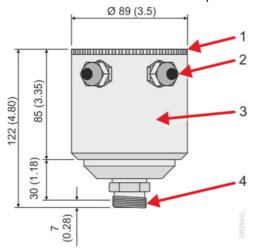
Technical specifications and mechanical structure of Flow-Guard V Dimensions in mm (in.)
